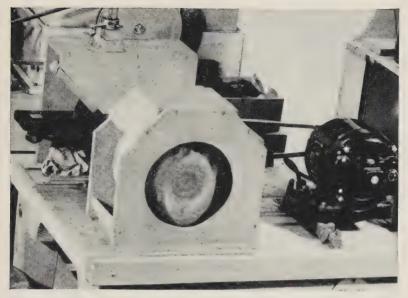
Sanding Drum and Sanding Disc Mounted and Guarded.
